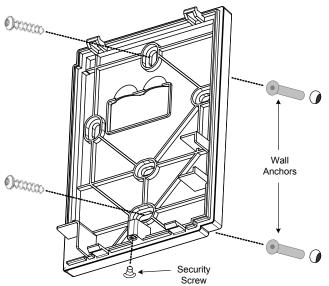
Mounting an Allure EC-Smart-Vue Sensor
